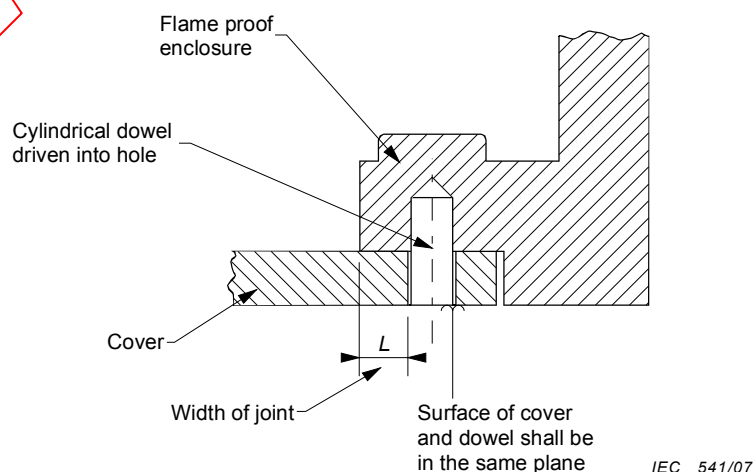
Example of construction for indirect checking of a flanged group I flameproof joint
